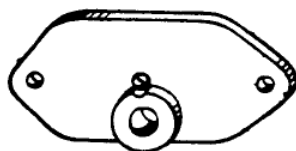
DRILLING TEMPLATE - CRANKCASE OIL RELIEF VALVE FACING.
